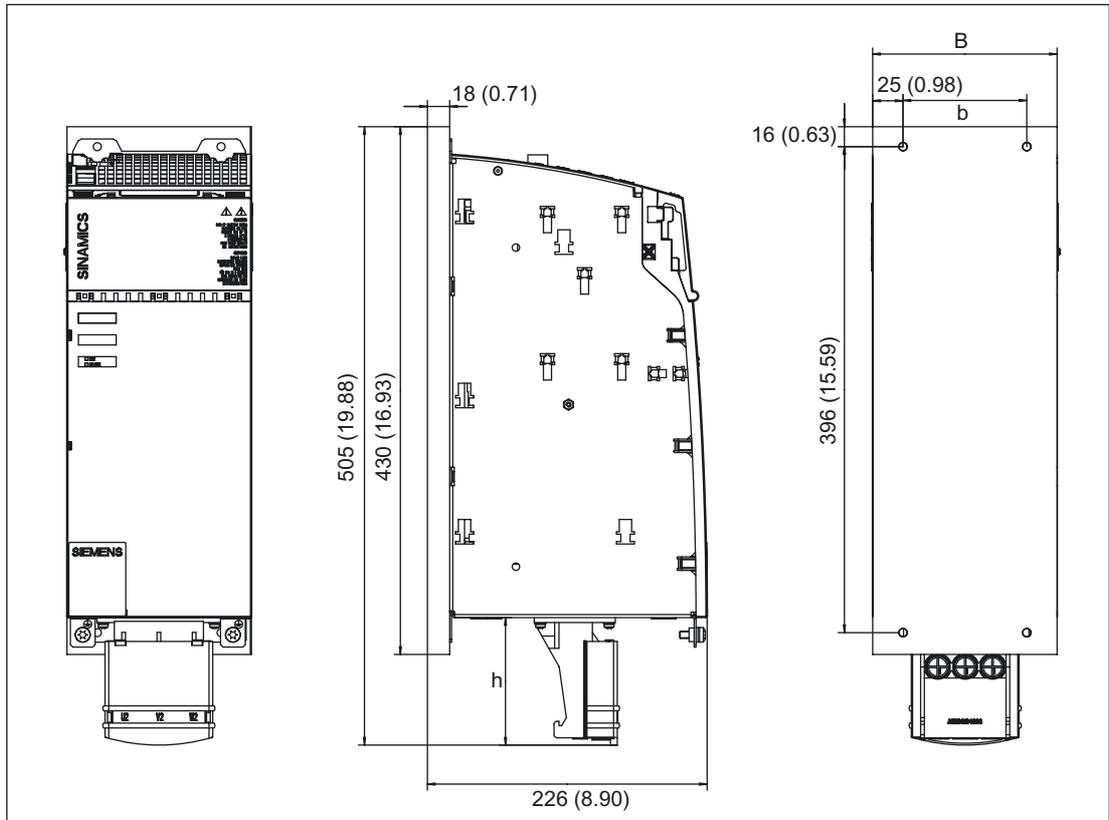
Dimension drawing of Motor Module with cold plate 45 A, 60 A, and 85 A, all dimensions in mm and (inches)
